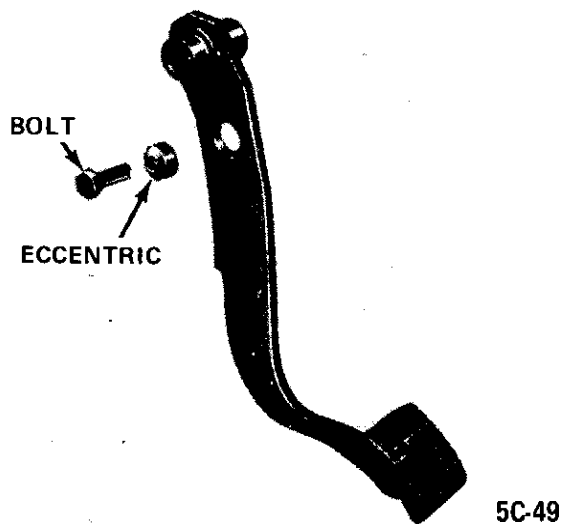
C-49 Brake Pedal Attaching Bolt and Eccentric
